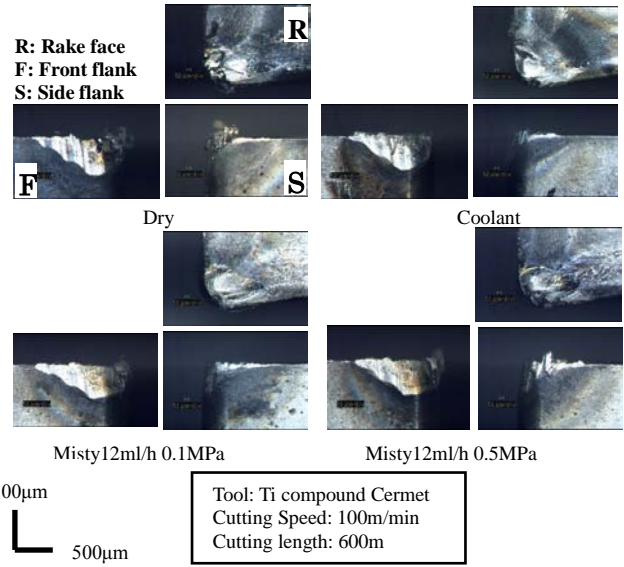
Close-up views of the flank wear land and the crater wear at 600m cutting length with Ti compound Cermet inserts
